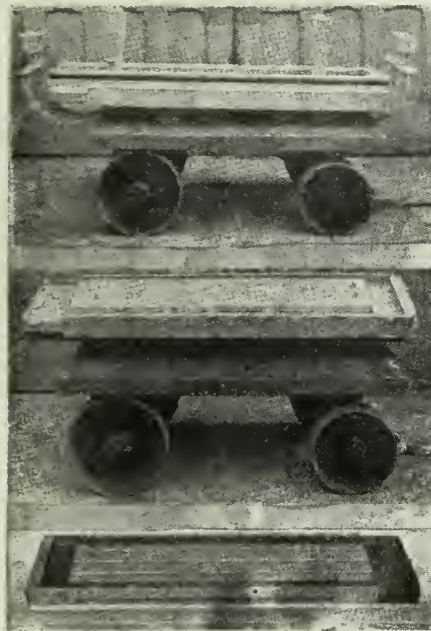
ROUGH CASTING SHOWING METHOD OF GATING.
